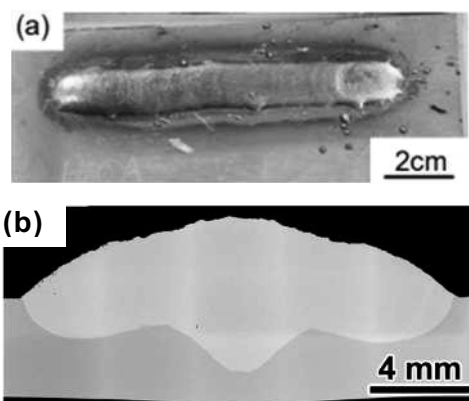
(a) Example of Weld bead appearance (b) SEM image of Cross section of weld bead.
